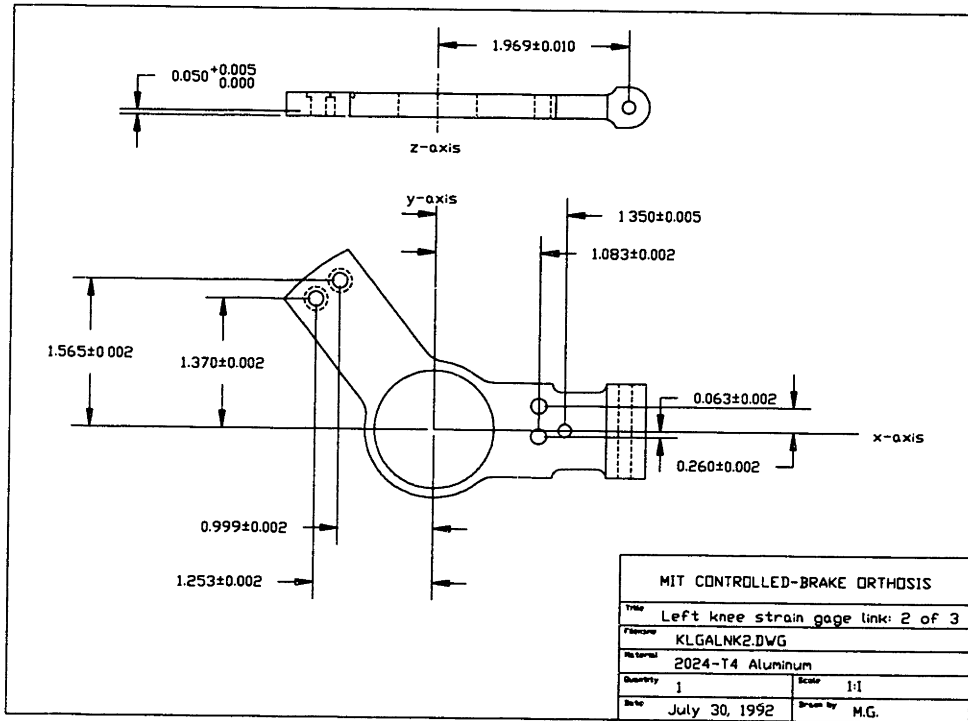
Link that couples left knee gear to the brace (drawing 2 of 3).
